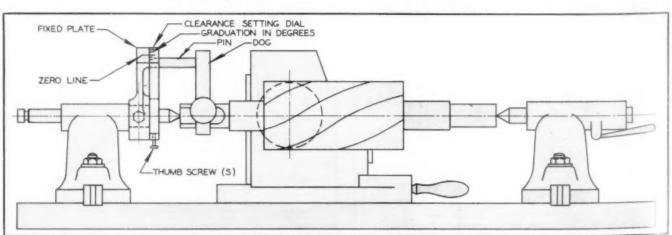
Clearance setting attachment used in grinding the clearance angle on a helical mill.
